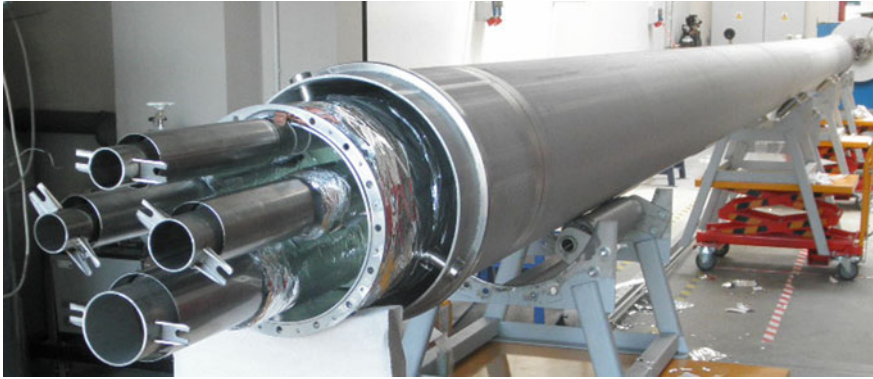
Straight module assembled (*courtesy* Kriosystem Ltd.)
